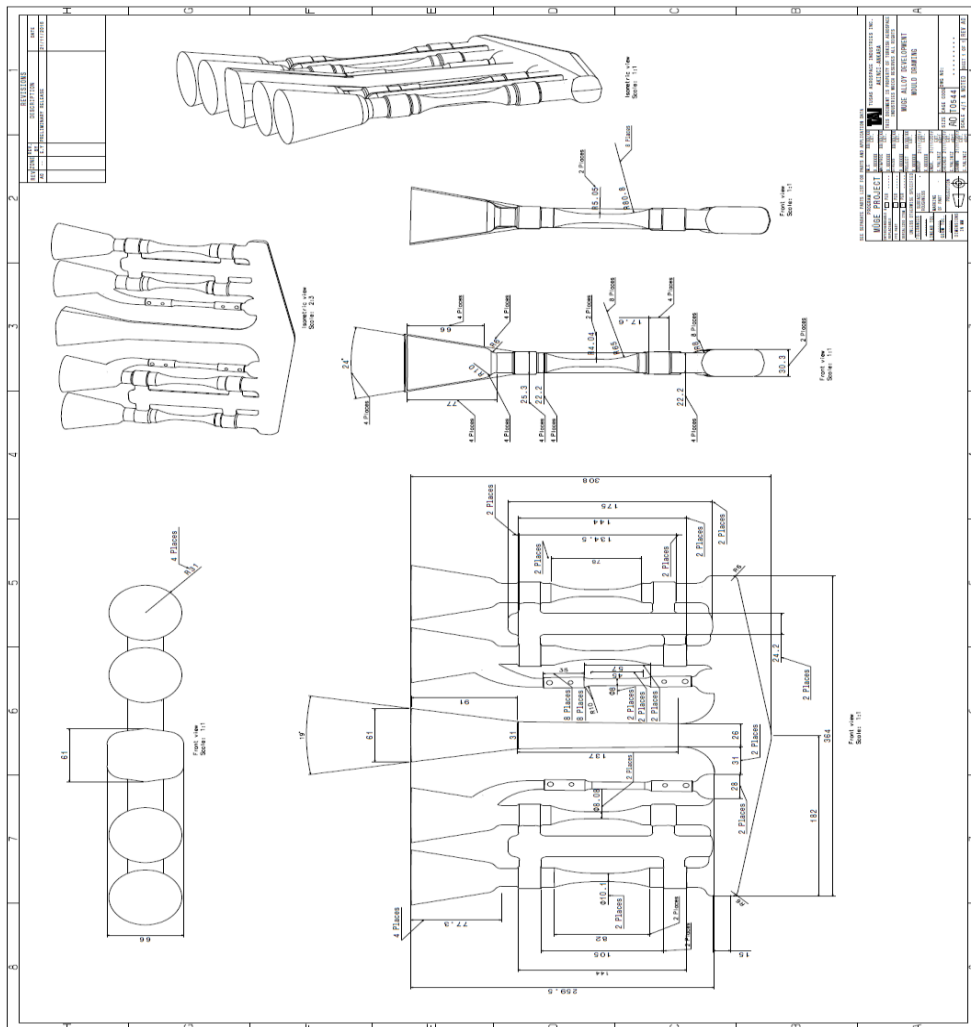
Technical drawing of CNC machined aluminum sand casting mould
